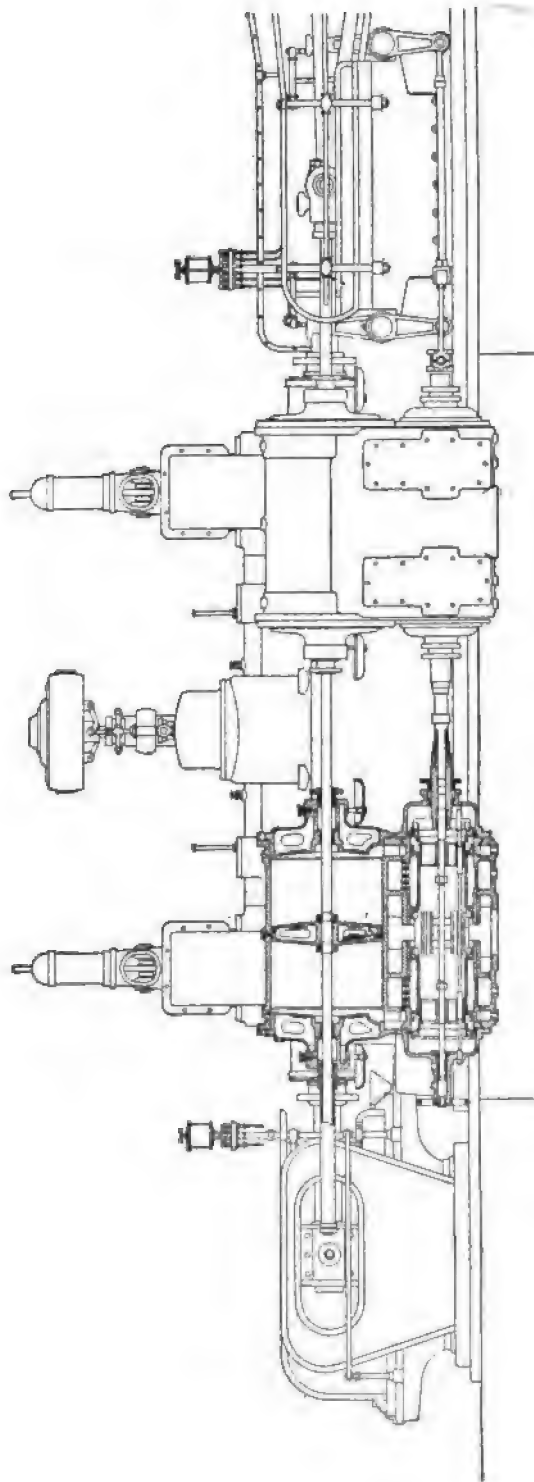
H.P. KÖRTING GAS-ENGINE, BY KÖRTING BROTHERS. (Longitudinal Section and Elevation.)
